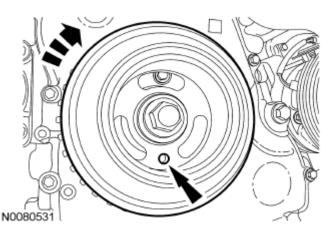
Positioning Crankshaft Pulley Hole At 6 O'Clock Position Courtesy of FORD MOTOR CO.
